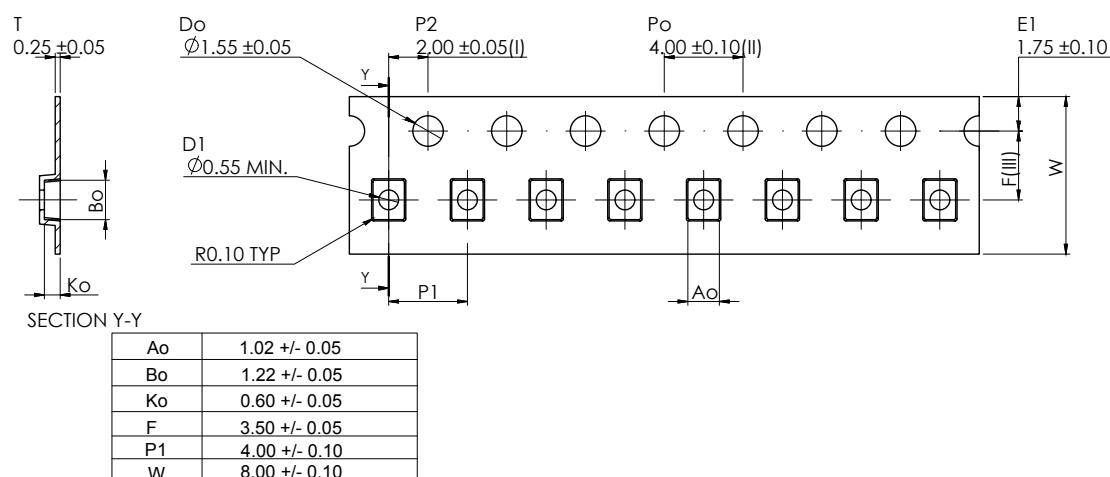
Drawing of tape (first-angle projection) with tape dimensions
